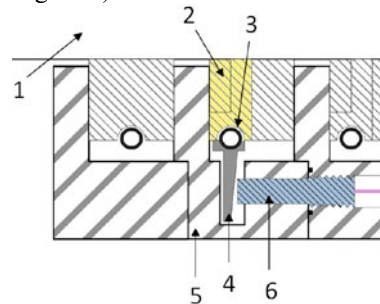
Sensor (6) arrangement by using an indicator rod (4) with sloped surface
